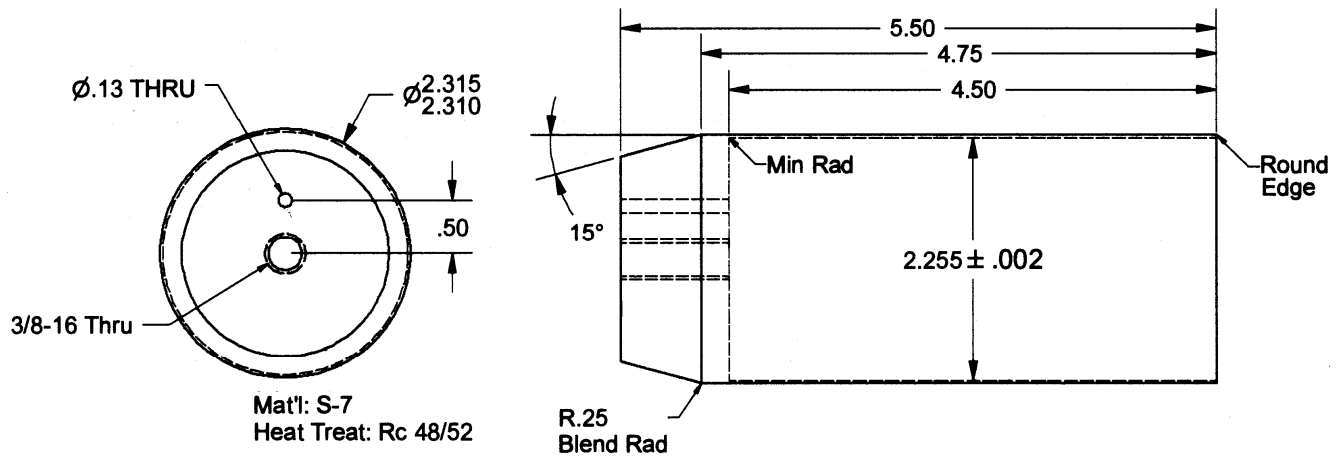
INSTALLATION TOOL (EQ144021-06)
